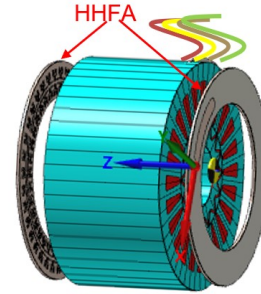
Concept of PD sensor integration in the end cap of an electric machine.
